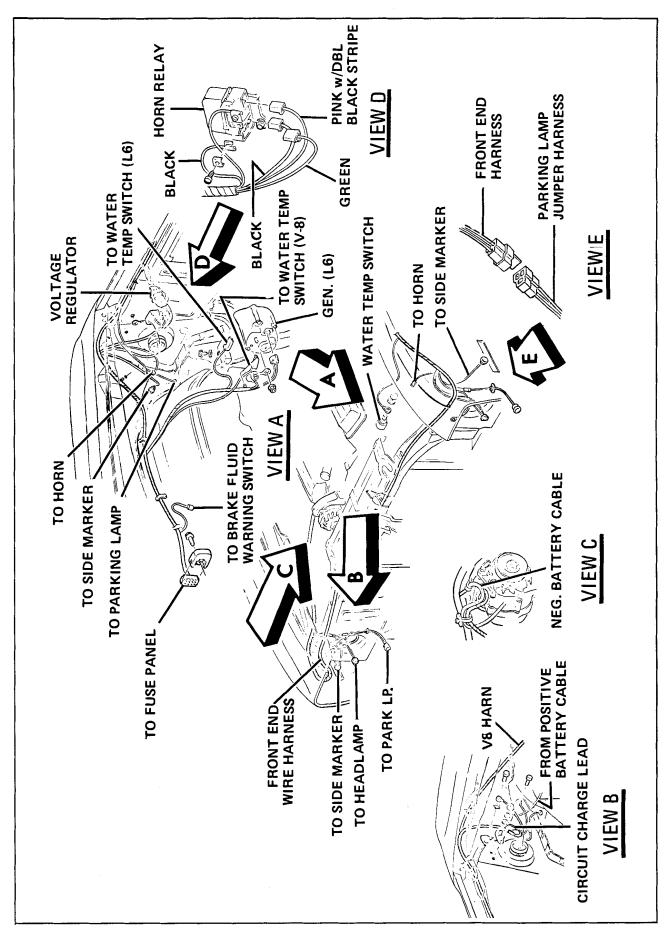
X Series Generator and Front End Wire Harness Installation
